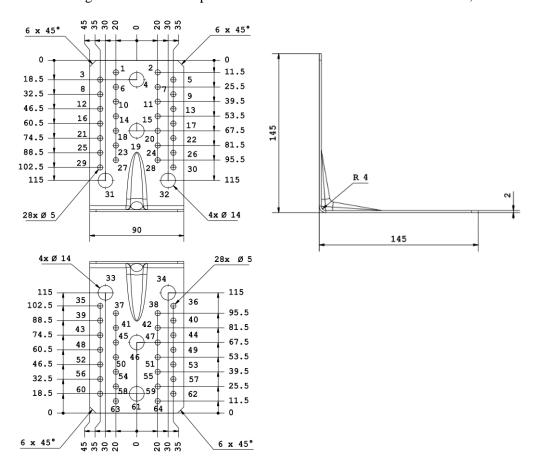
Dimensions of Angle Bracket 145 with rib, thickness 2,0 mm
